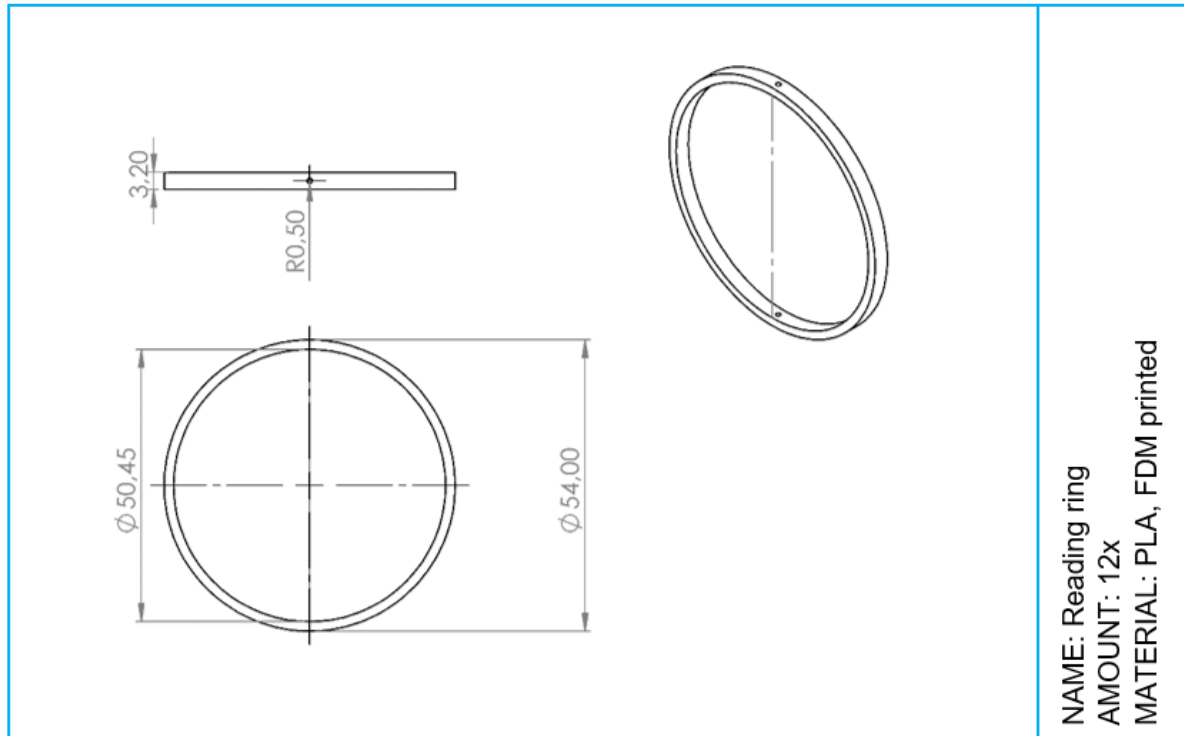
Construction drawings of the reading ring - 3D Printed prototype
